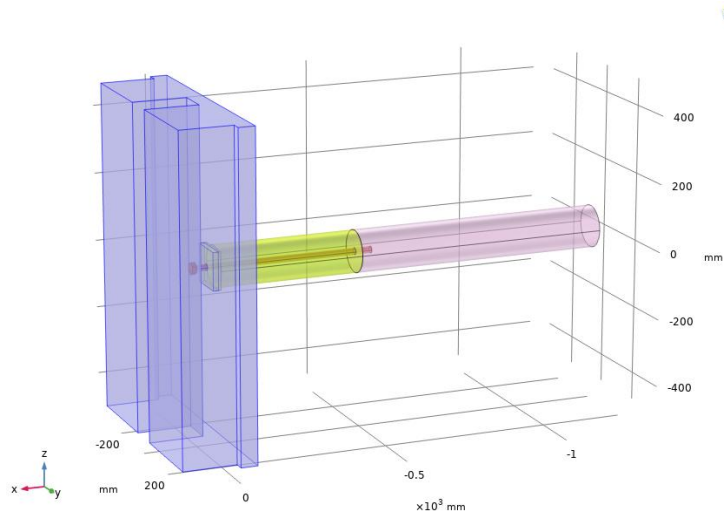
Core Support Shaft 3D model Simplification Of Index Core Rotation System Double Injection
